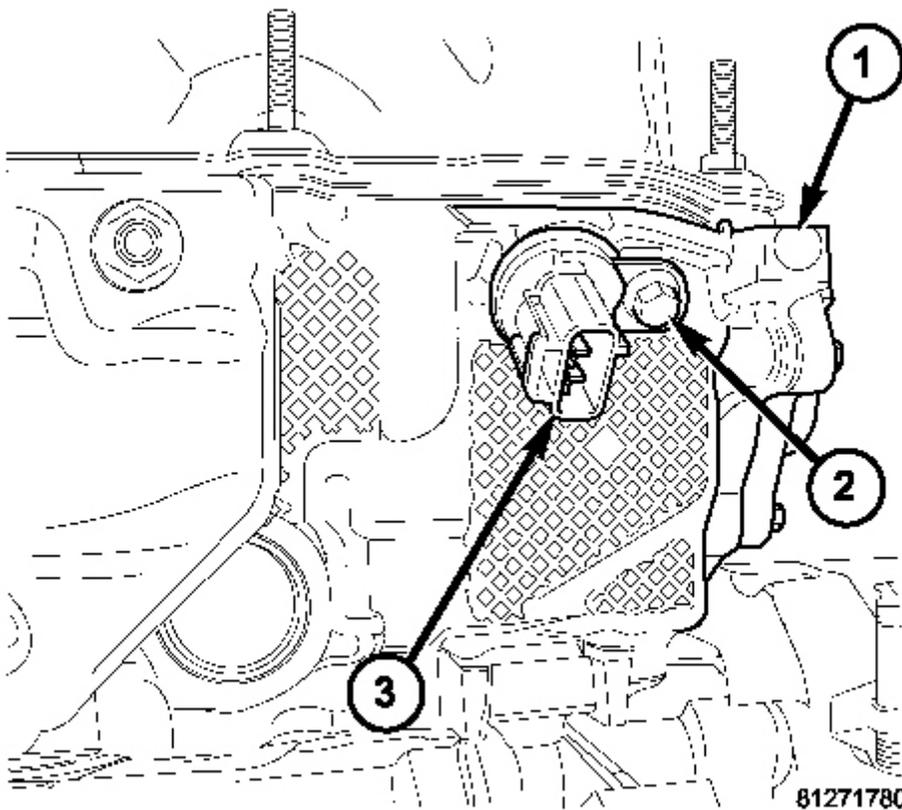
Identifying Right Cylinder Head, Sensor Mounting Bolt & Camshaft Position Sensor (CMP)
